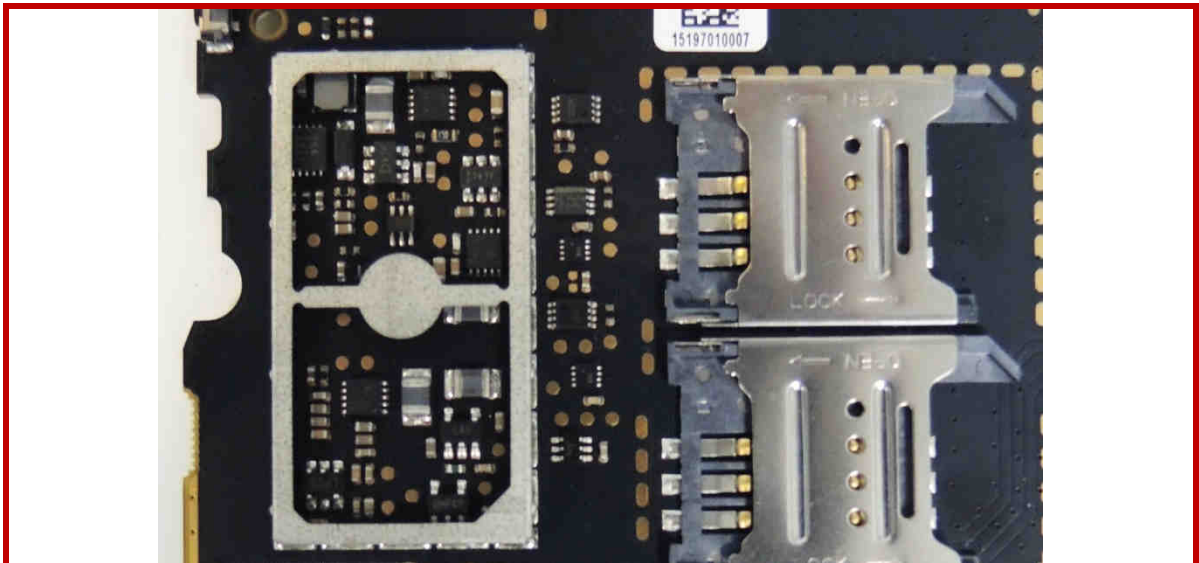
Bottom side of the Main board : Power Management and 2 Secure Access Modules (or SAM)/
